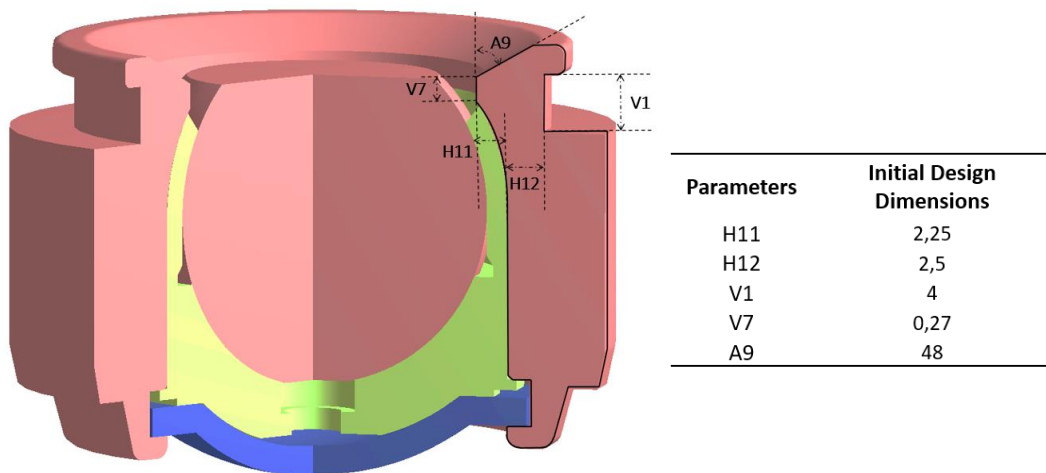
Ball Joints Input Parameters & Initial Design Dimensions
